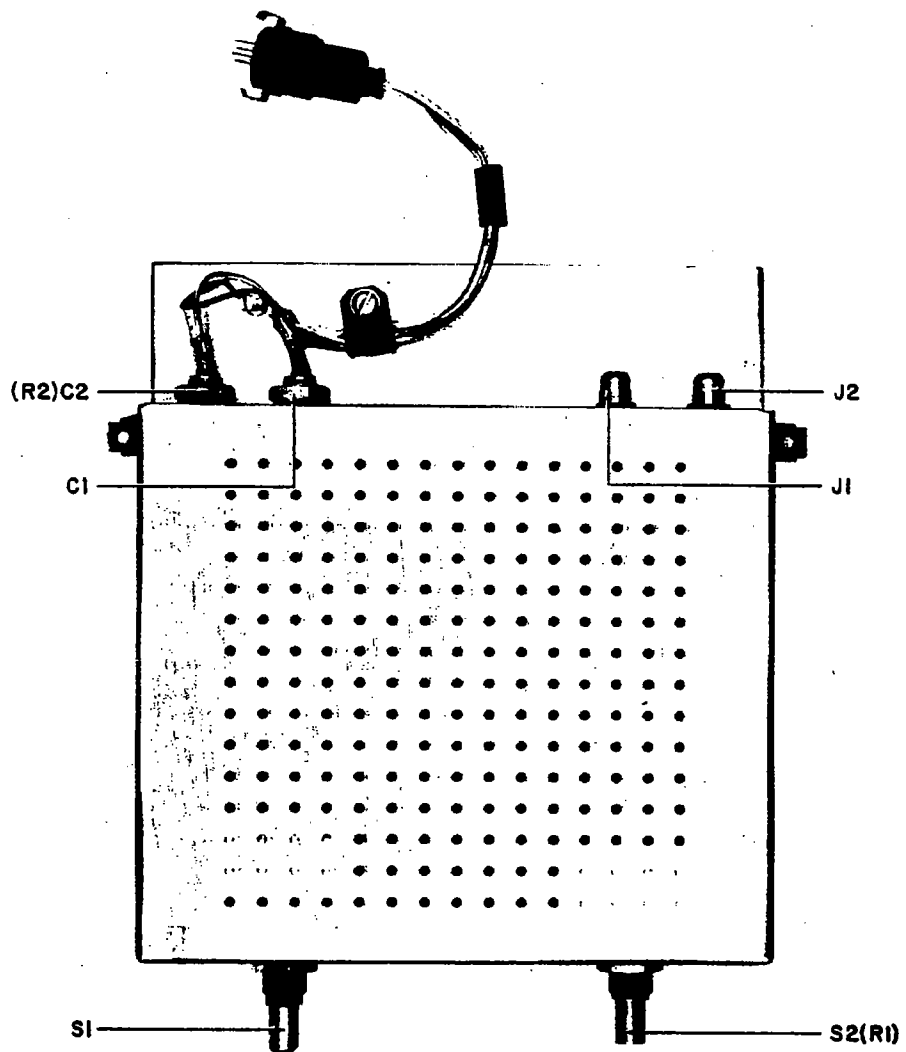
Type 79977 HF Counter Assembly (A17) Bottom View, Component Locations
